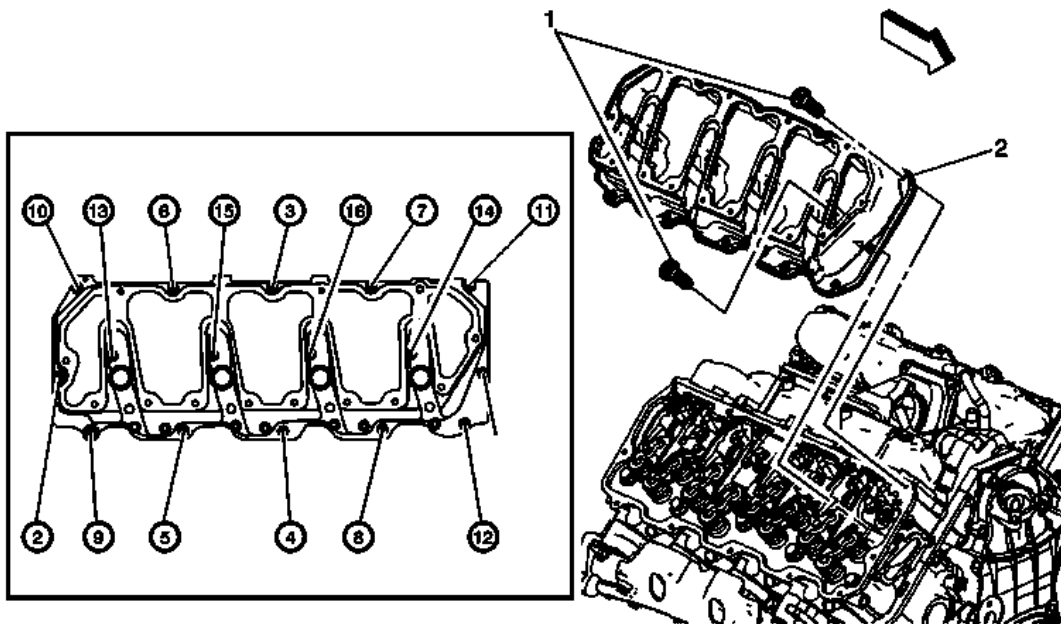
Valve Rocker Arm Lower Cover And Fastener With Tightening Sequence - Right Side
